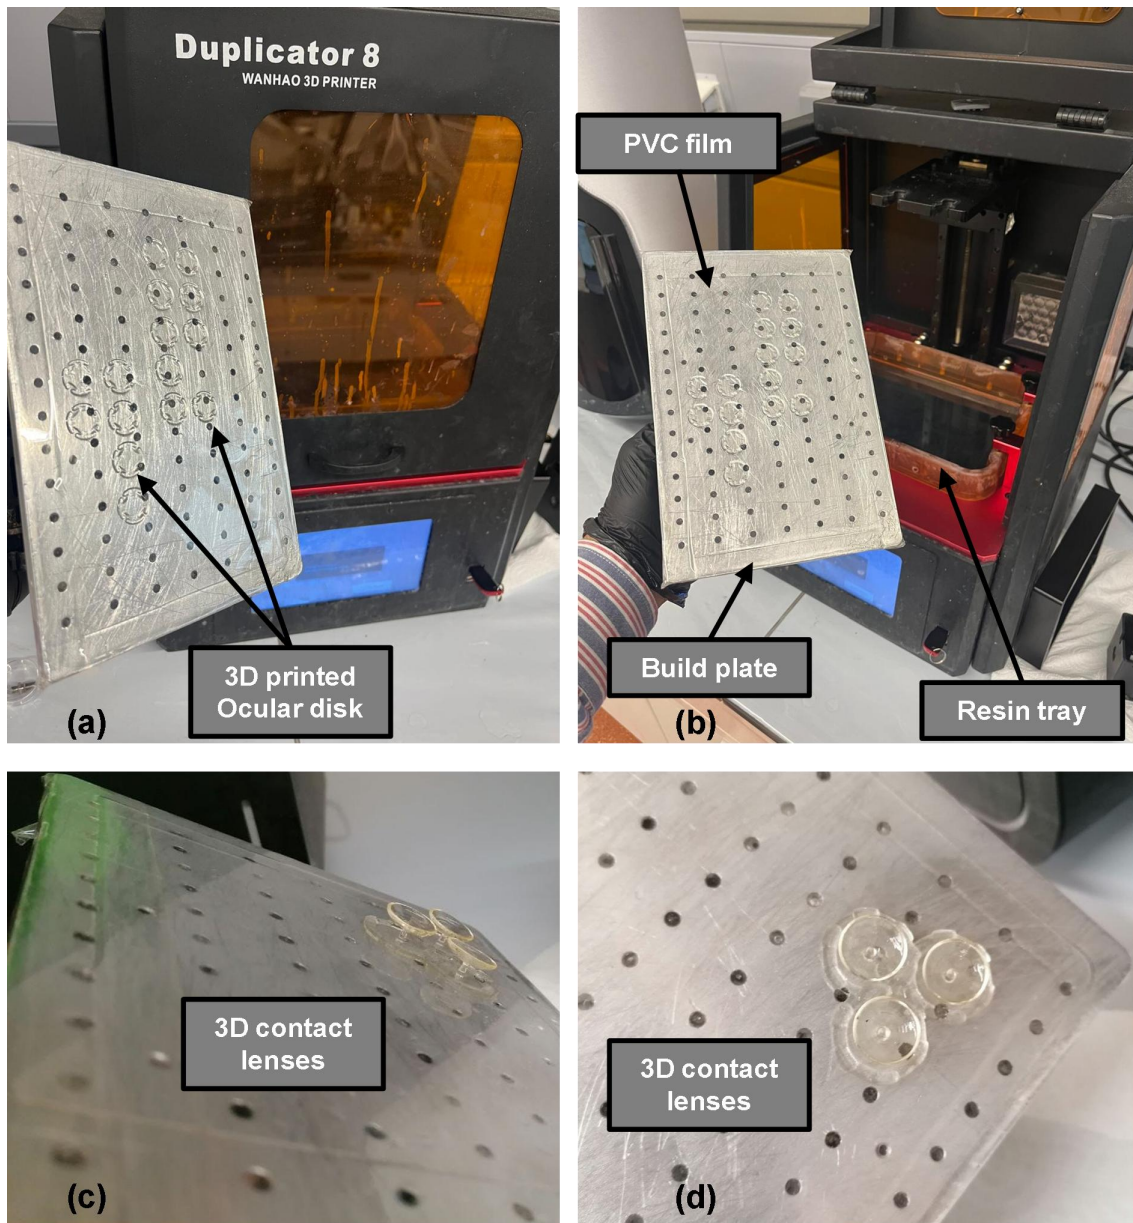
Close - up view of the (a-b) 3D printed ocular disc and (c-d) 3D-printed contact lenses on the build plate alongside the 3D printer used.
